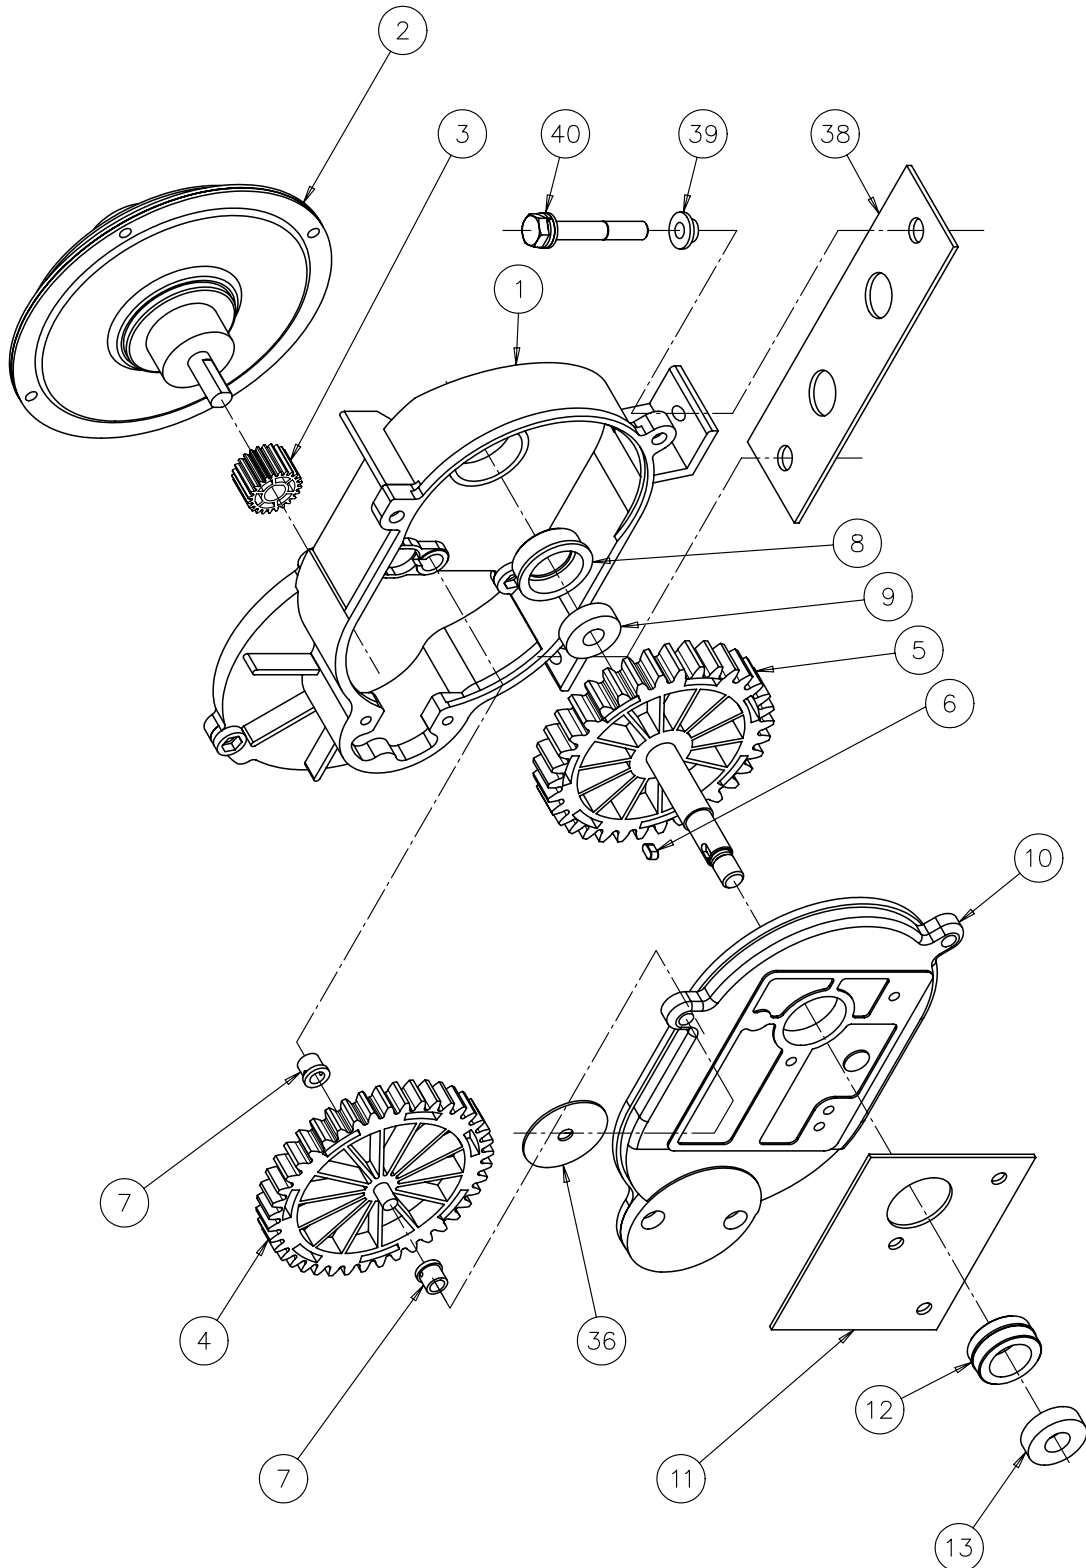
Disassembly Drawing of Wire Feed Reduction Gear Unit
